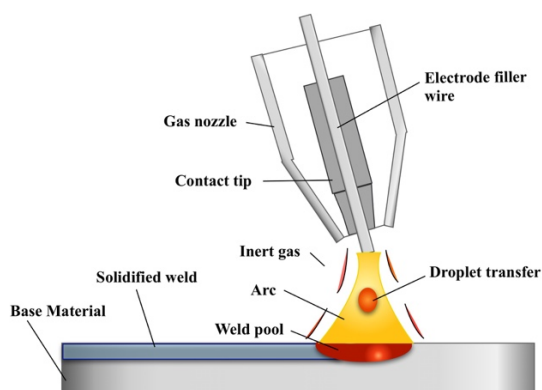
Illustration of metal inert gas welding process [29].
